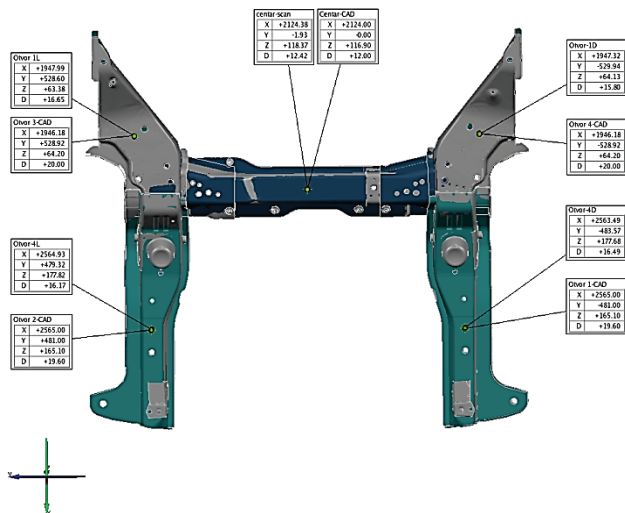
Coordinates of centring jigs on digitized part and CAD model (Best Fit registration)
